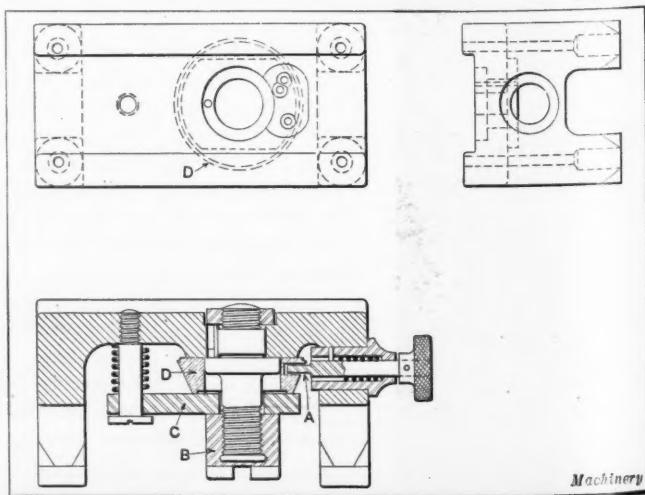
Jig for drilling Holes at Ends of Powder Train Channel and also "Locating Hole"
